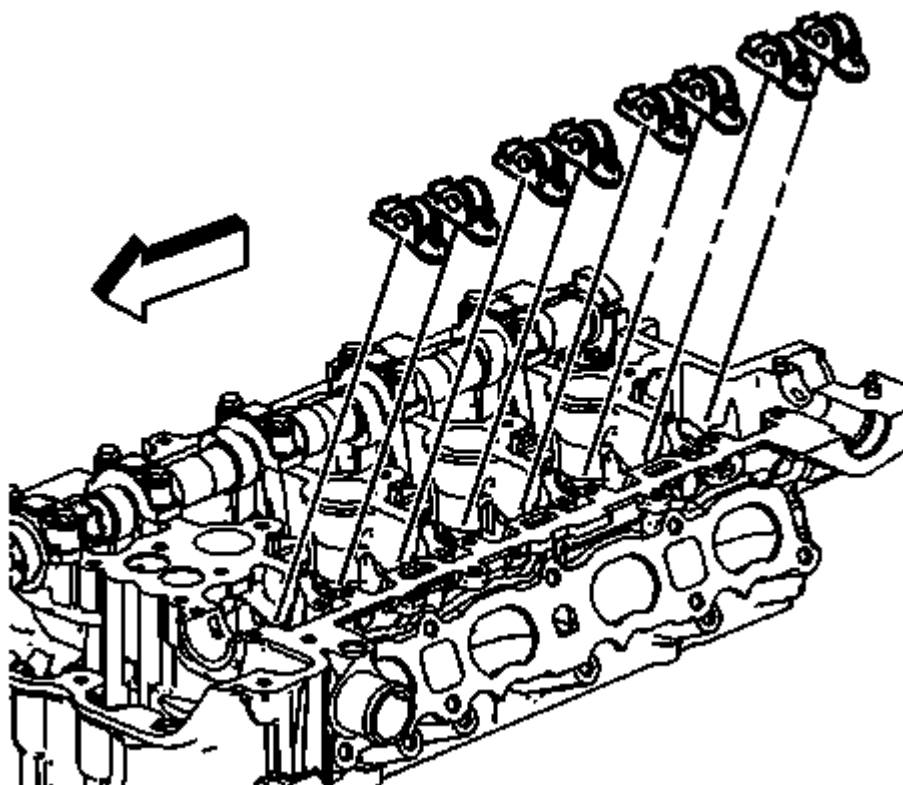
Intake Camshaft Bearing Rear Cap Bolts And Cap
